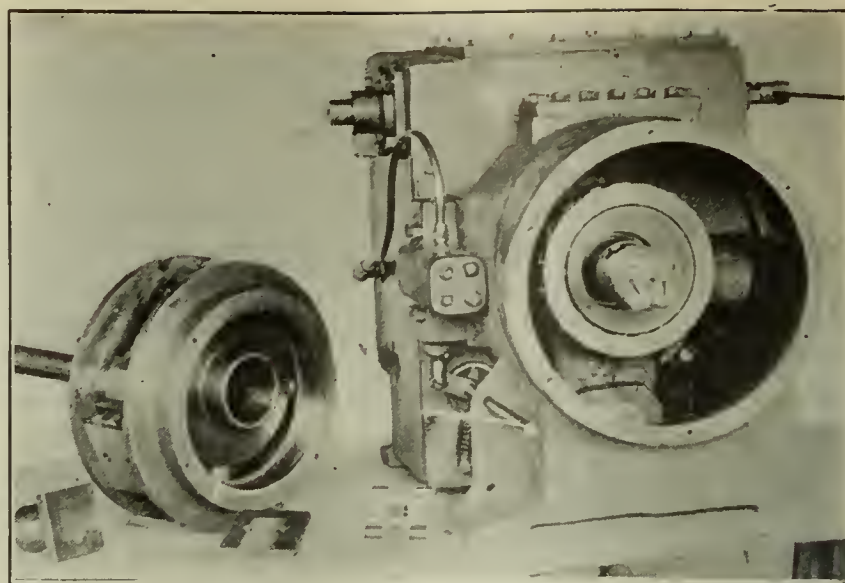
MOTOR END OF OILGEAR VARIABLE SPEED DRIVE
